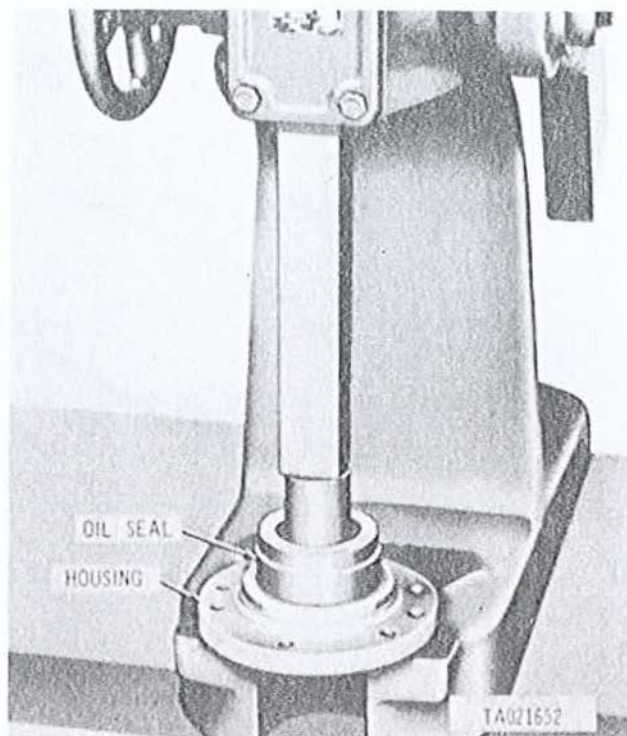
Pressing oil seal into fan drive oil seal housing.
